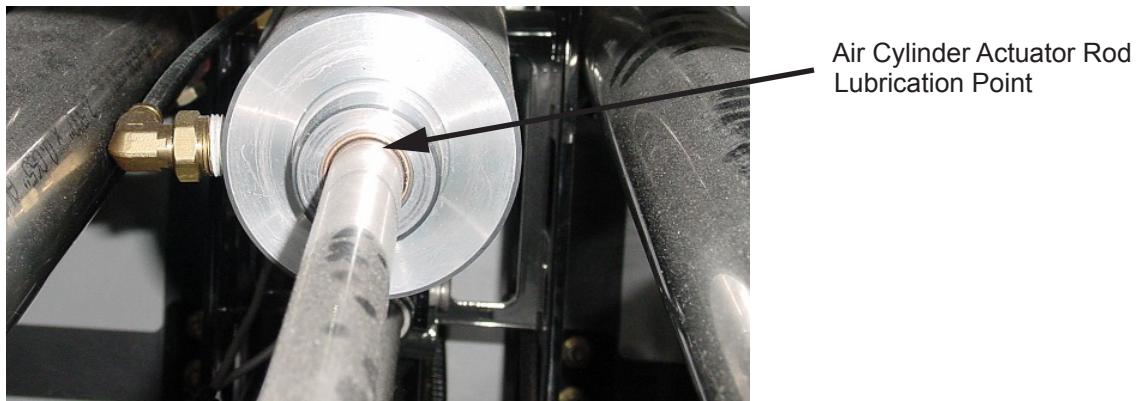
Air Cylinder Actuator Rod Lubrication
